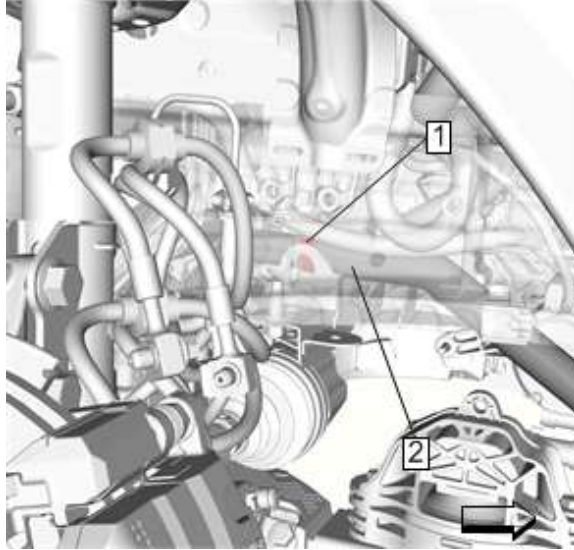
Drive Motor Battery Coolant Cooler Inlet Hose And Retainer
